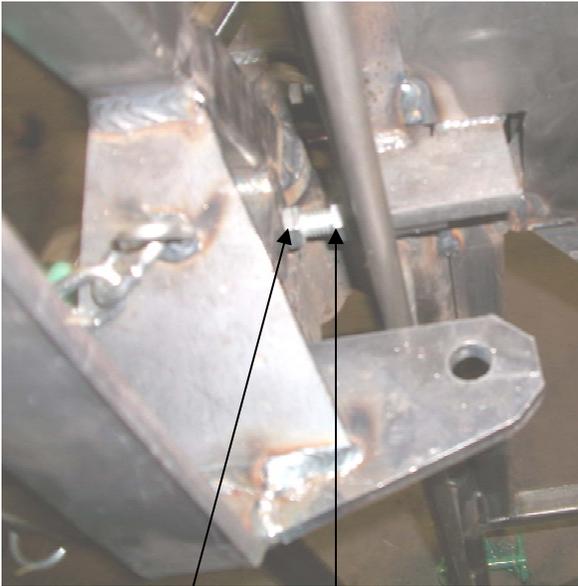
and 24. Install empty Counterbalance Pan onto back of Hoist. Place it so channel in bottom of Pan slips over rectangular Tube on back of Hoist. Slide Pan forward until holes in bracket align with holes in Boom and secure Pan in place with Pin and Clip attached to Pan. Load 16 concrete-filled Garlock Counterweights into Pan as shown.
